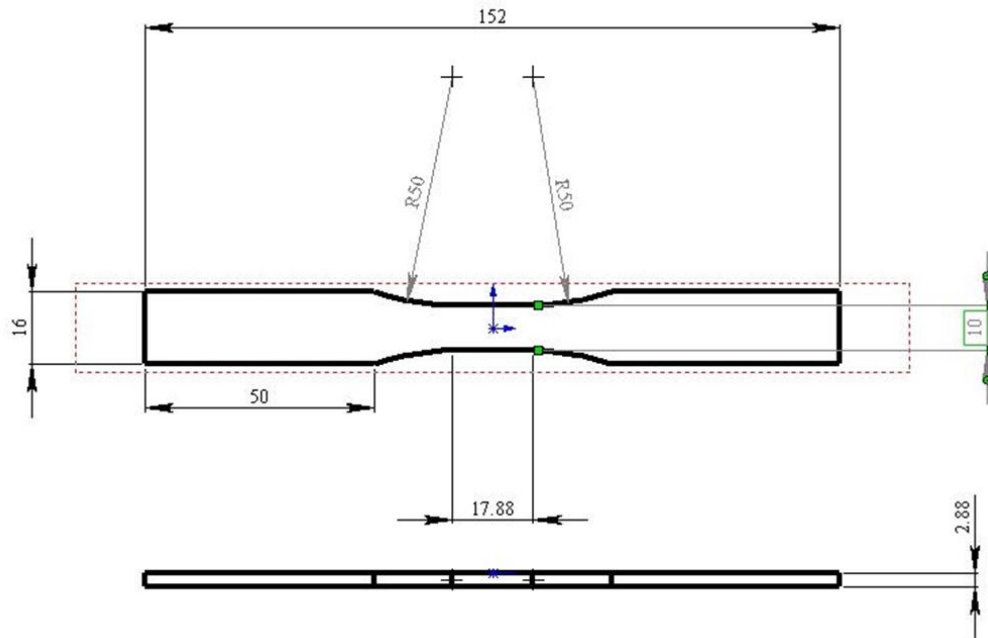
Drawing of test specimen geometry (dimensions in mm)
